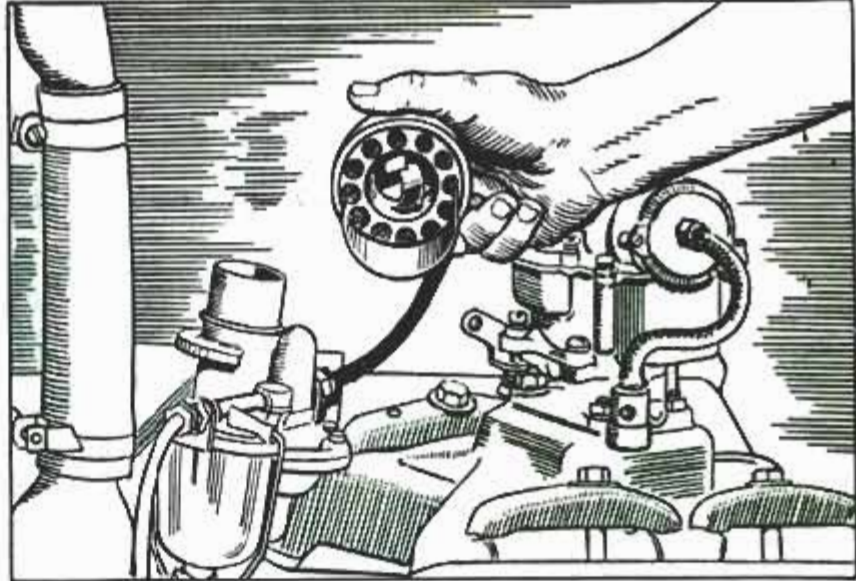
The cap on the oil-filler tube of most V8 engines contains a filter of copper mesh. Remove the cap, immerse it in gasoline, then remove and allow to drain dry before replacing
